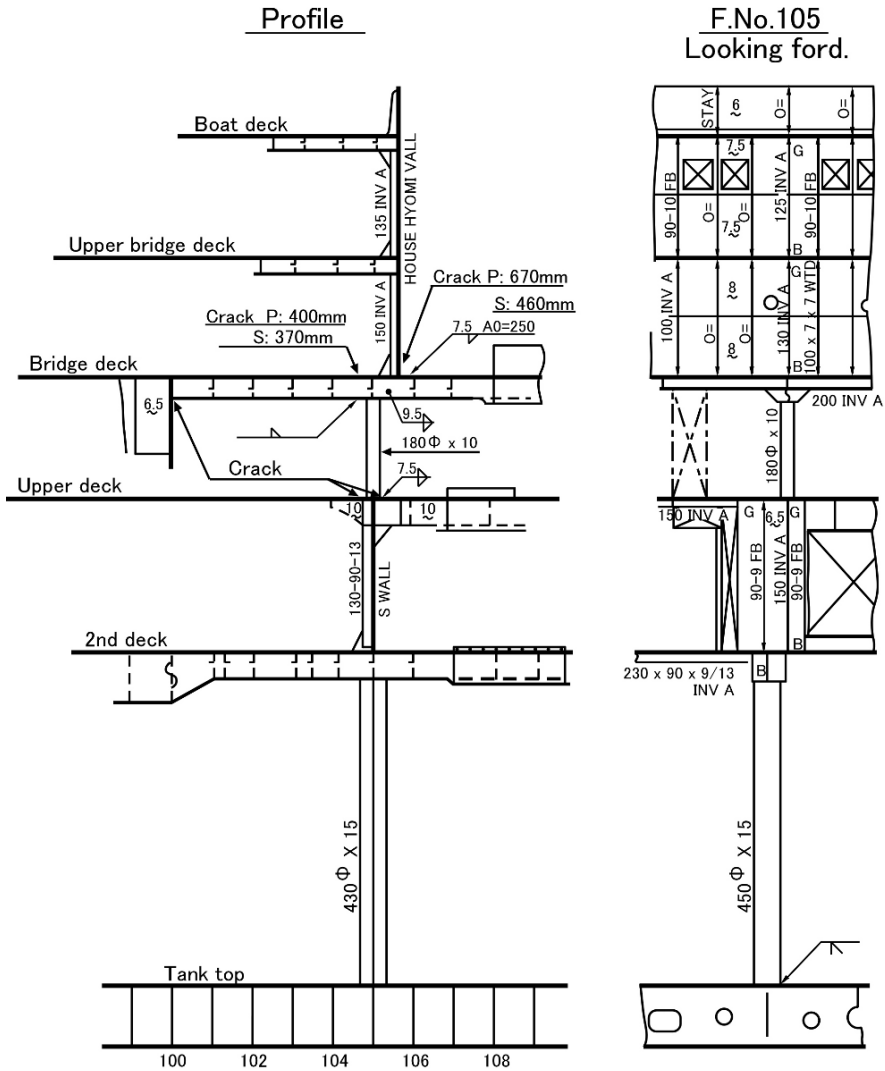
Crack at fixed end of circular pillar due to tension
